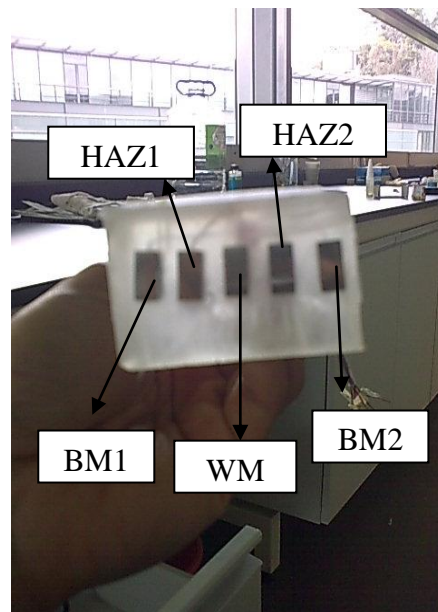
Bottom view of the sample showing the different weld regions
